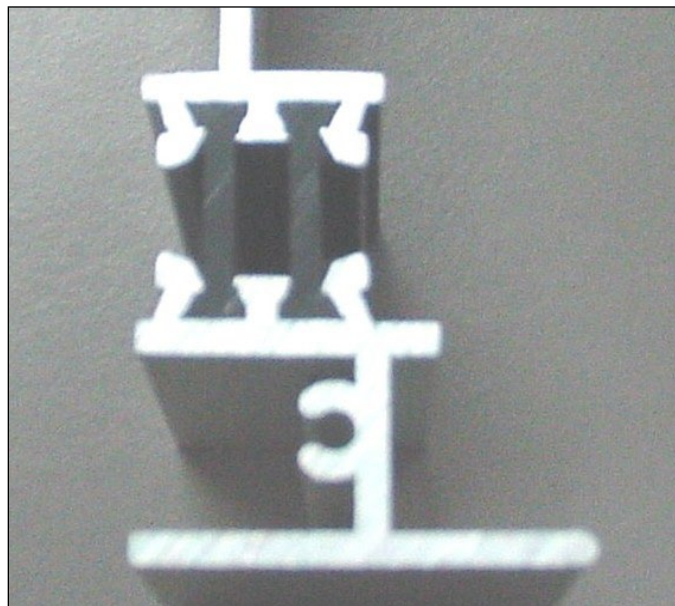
Close-Up Picture of Crimped Thermal Barrier Section
